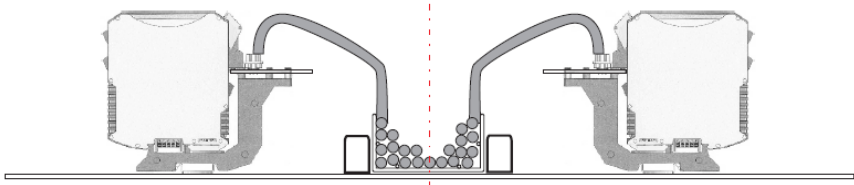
View (cross section) of the pac-Carrier and cable duct
